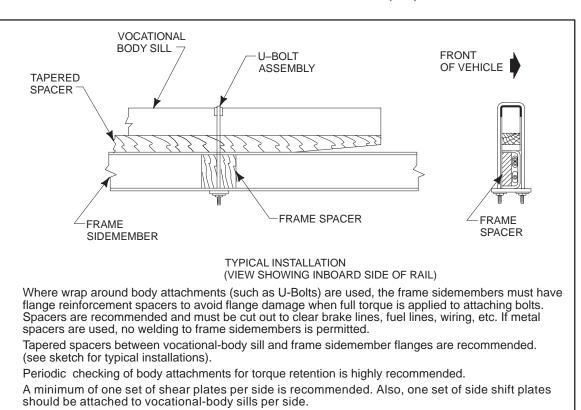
FIGURE E - SUPER DUTY F-SERIES SUB MOUNTING TECHNIQUE #4 FOR 60", 84", AND 120" CA CHASSIS CABS.
